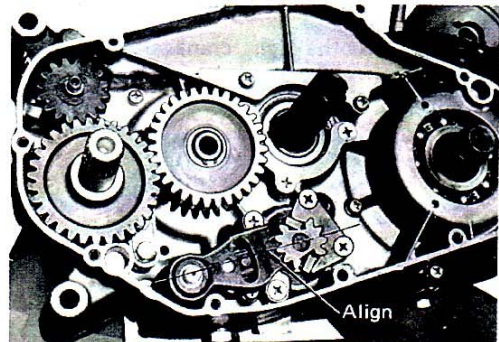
Aligning center of sector with gear shifting pawl holder
